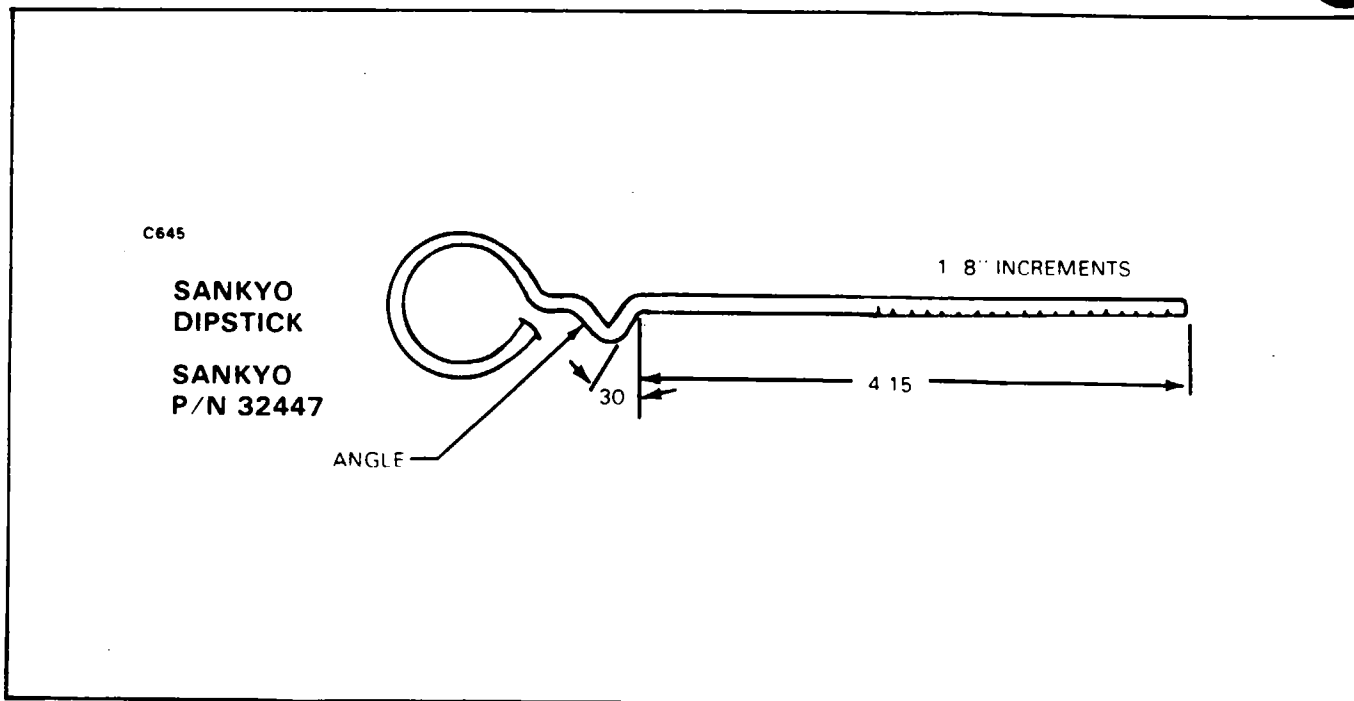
Fabricated Dipsticks for Compressor Oil Check
